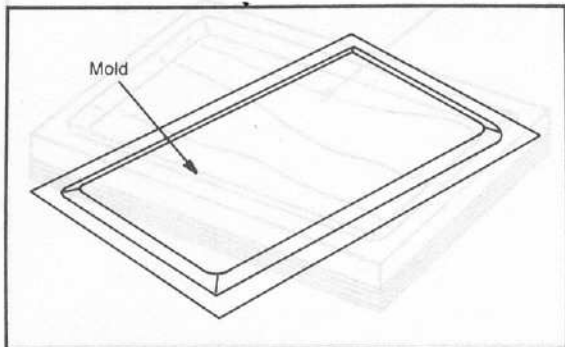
Convex contact mold for tray form gives molding with smooth concave side.
